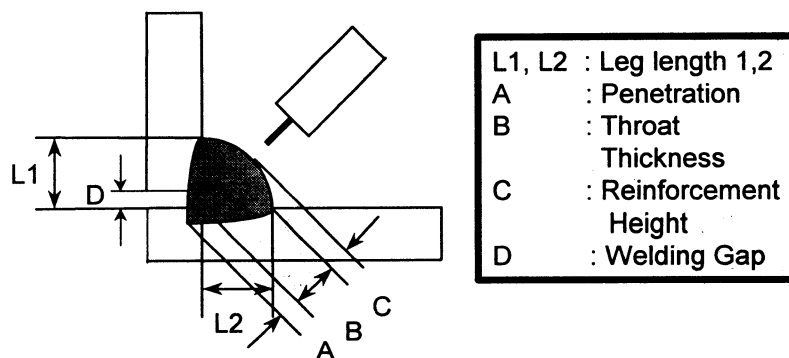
Profile of weld bead shape in Horizontal Fillet Welding
